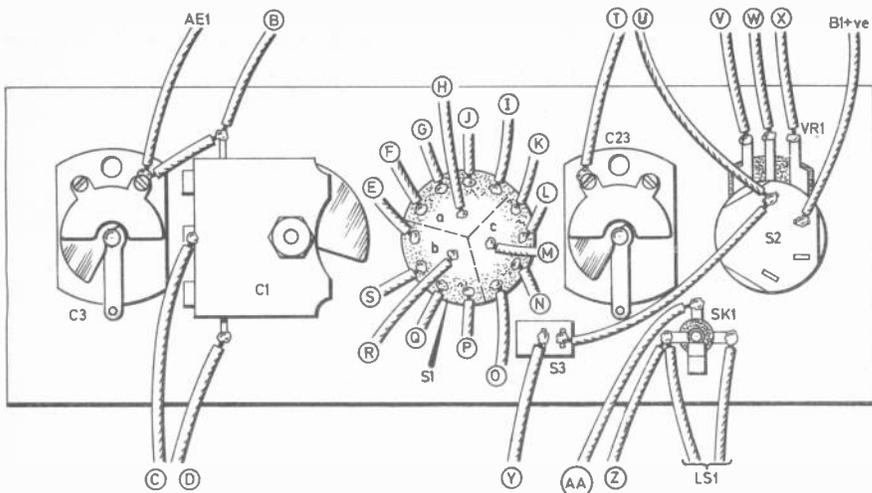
The layout and interwiring of the front panel mounted components. See photograph and text for C3/C1 bracket fixing details.
